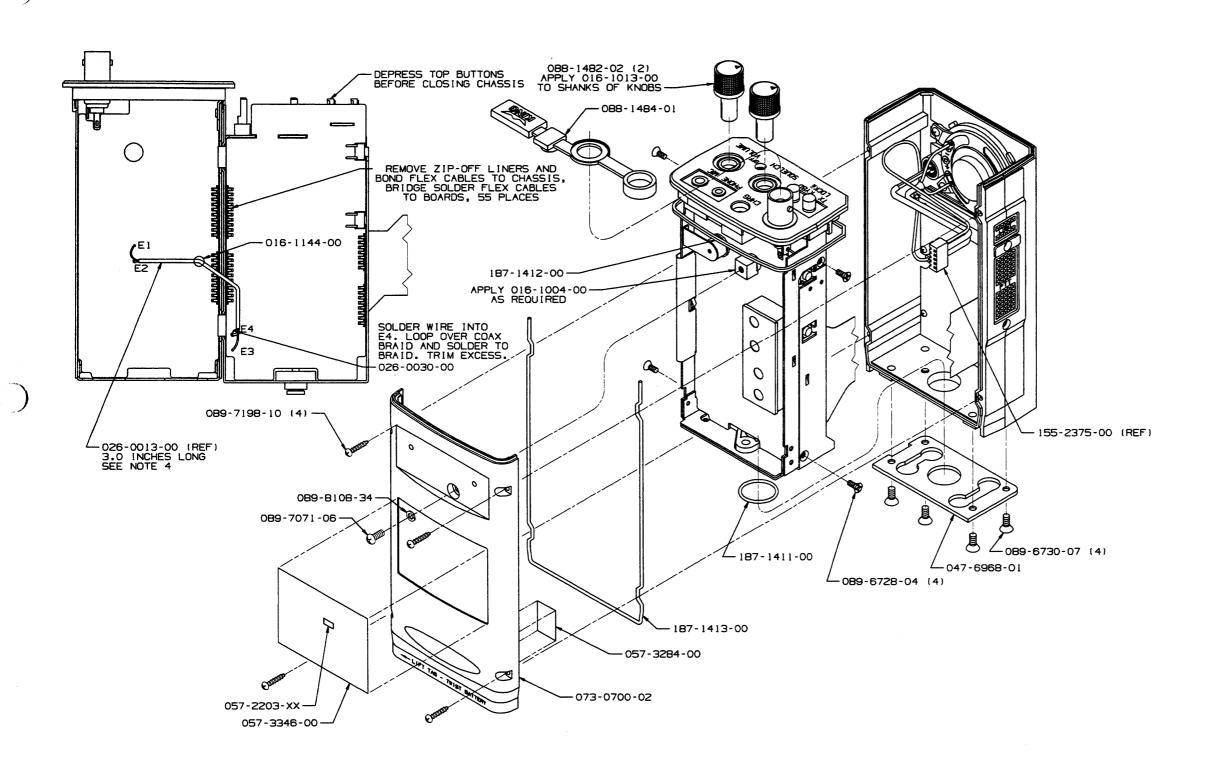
KX 99 FINAL ASSEMBLY (Dwg No 300-3635-00 R-3) (Sheet 2 of 2)
